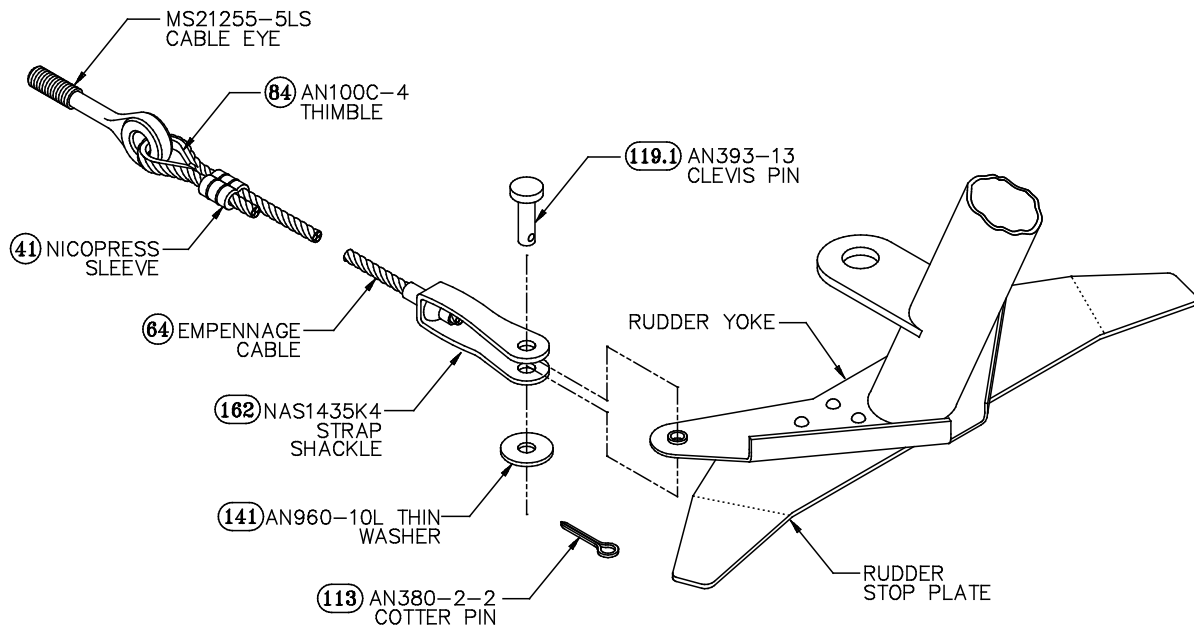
Aft Rudder Cable Attachment to Rudder Yoke
